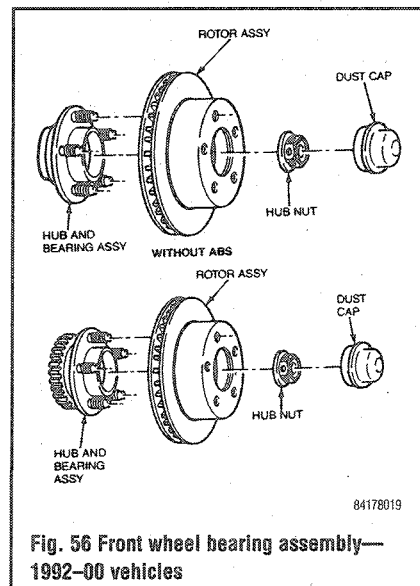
Front wheel bearing assembly—1992–00 vehicles
